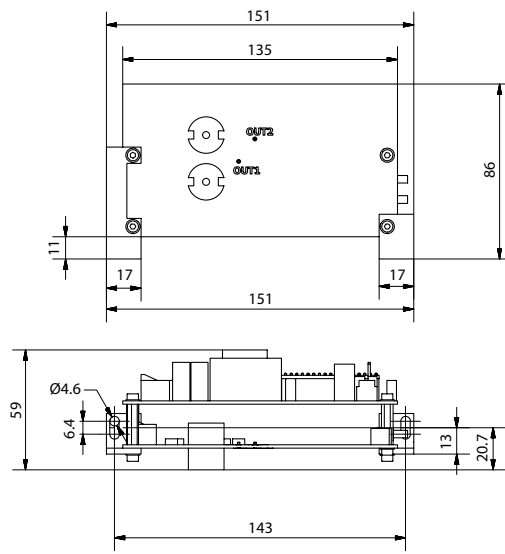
Outline drawing of DPB-3 or DPB-2.5 drivers
